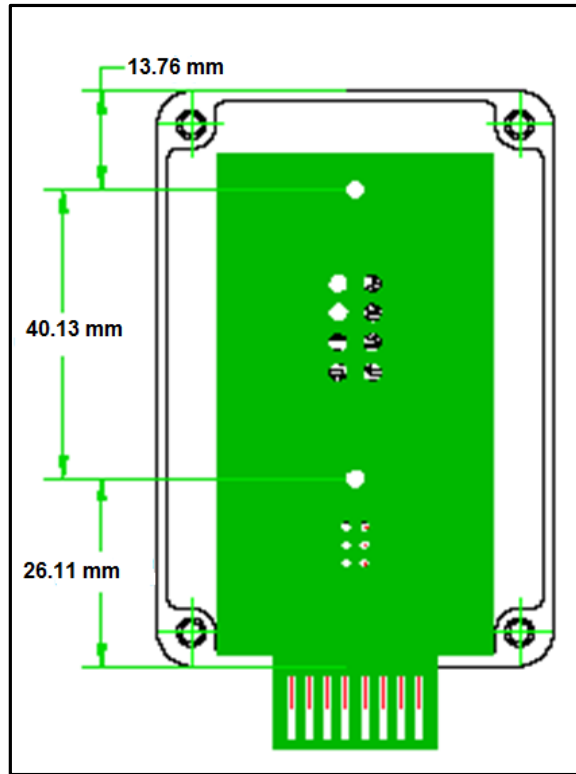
(h) Design for standoff to mount sensor PCB in the box
